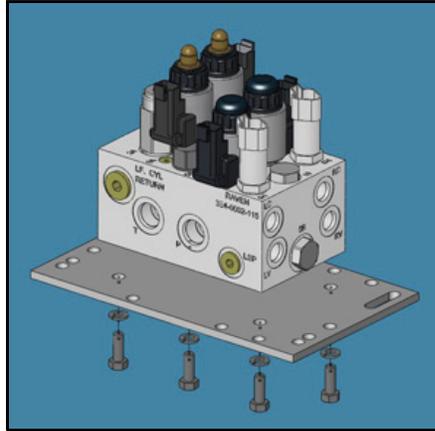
Fittings Installed on the AutoBoom Valve.
